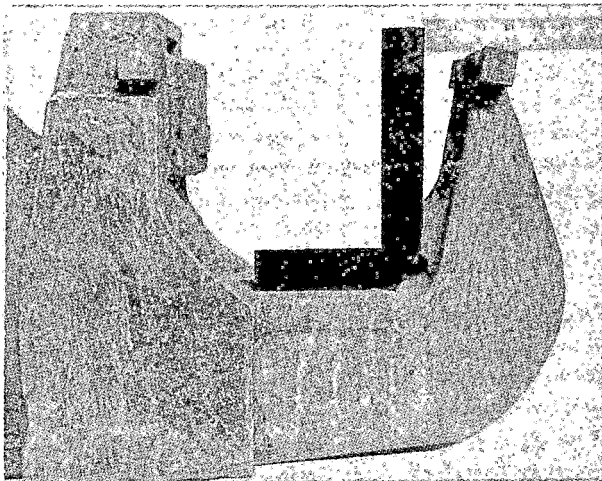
Outer pedestal of Design D ($1\frac{1}{16}$ -in. radius - $\frac{13}{16}$ -in. section) of impact tests under 915-lb drop hammer from a maximum height of 7 ft
